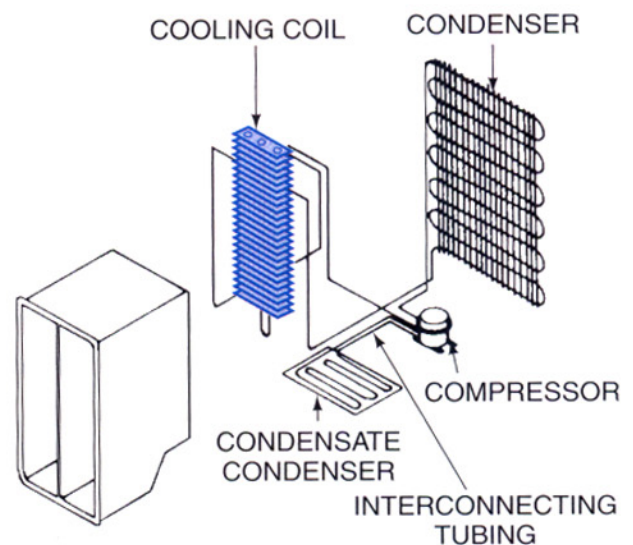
Typical evaporator locations in a refrigerator. Courtesy White Consolidated Industries, Inc.
